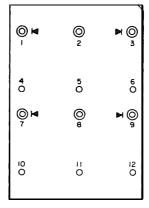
Component board assembly 1A3A9A2, terminal location diagram.
